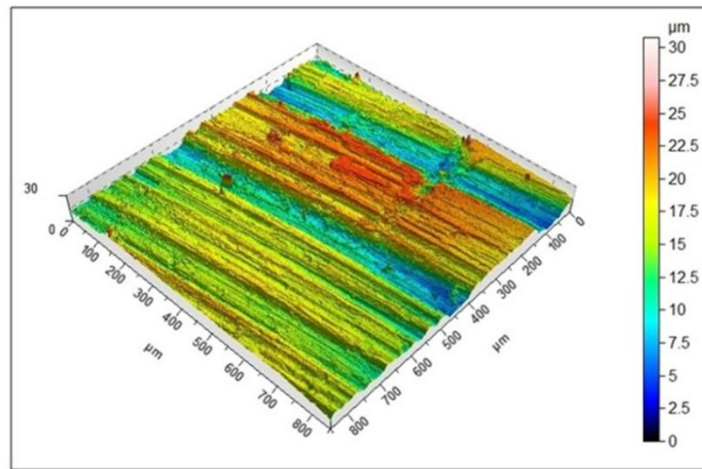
Three dimensional topography of AISI 1050 steel at 0.24 mm/rev feed (75 m/min cutting speed, 1 mm depth of cut 2 mm tool separation distance)
